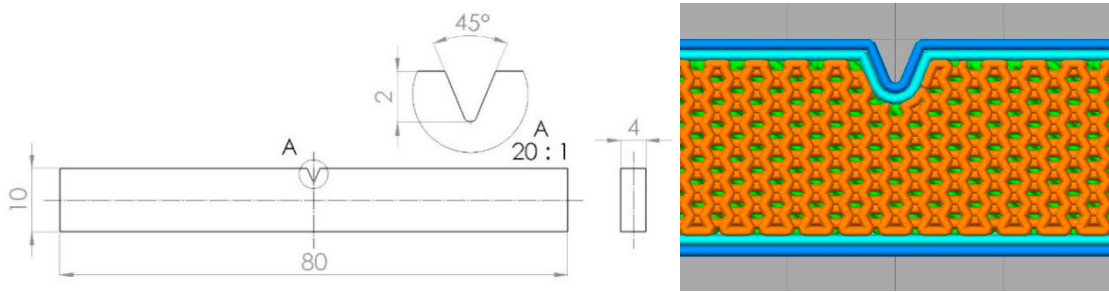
(Left) Charpy specimen dimensions (in mm); (Right) Layer structure.
